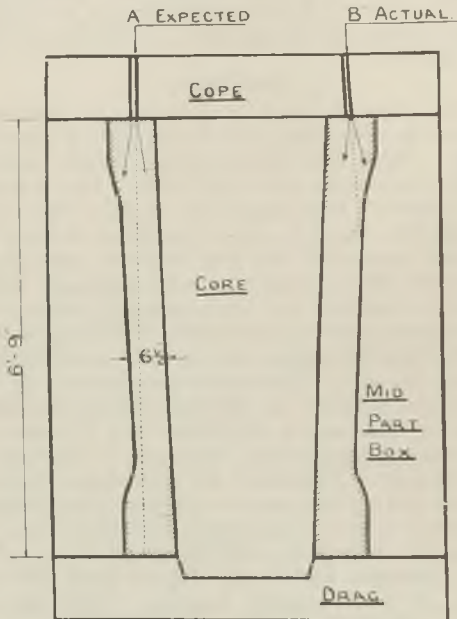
SHOWING HOT TEARS, IMPROPER LOAM STAMP AND FINS.
